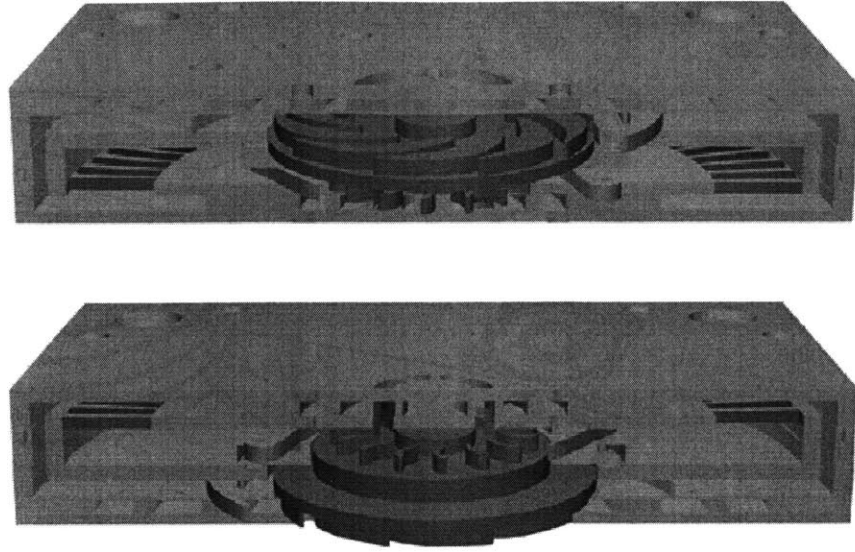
Schematic of a cross-sectional cut view of a microengine design.
